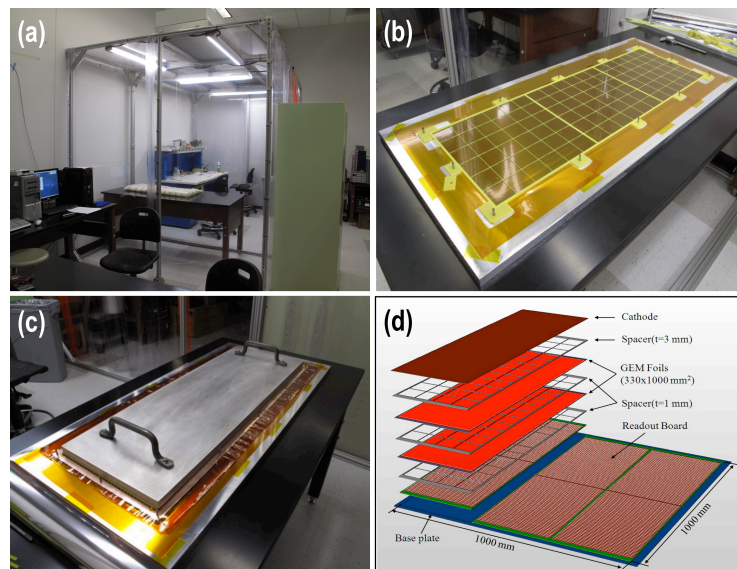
(a) 12'x8' clean room for LGEM construction (b) An LGEM layer on an assembly jig held by alignment pins throughout the sides (c) glue curing process with heavy flattening pressing plane (d) Layout of a full 100cm x 100cm GEM DHCAL active layer.
